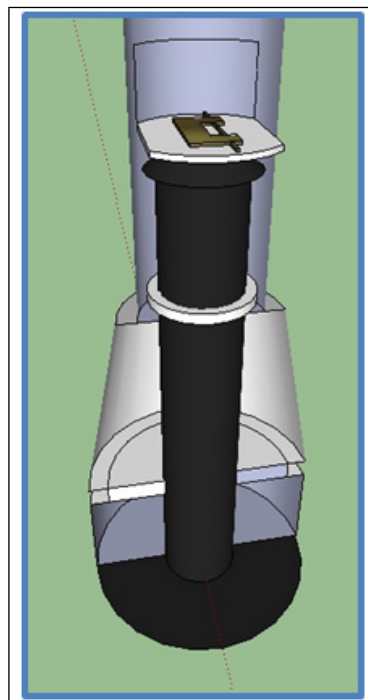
Instead of using a spring inside the cane, the rubber base is substituted for the spring. This makes the design easier to construct.
